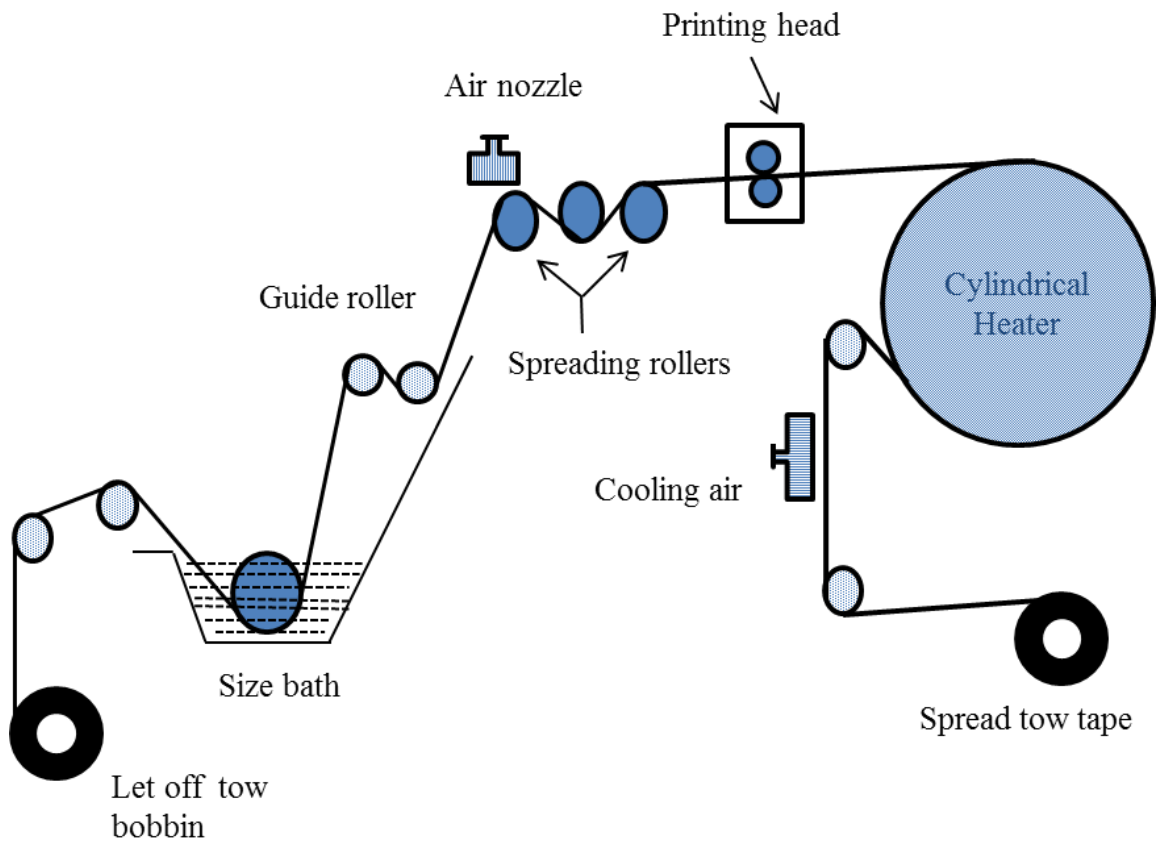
Schematic diagram of the tow (web) processing machine.
